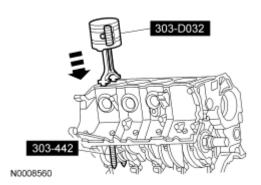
Using Special Tools To Install Piston And Connecting Rod Assembly Courtesy of FORD MOTOR CO.
